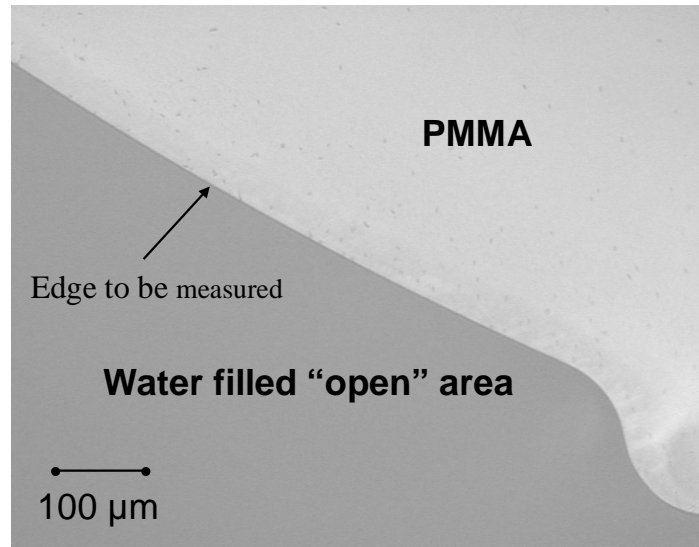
Typical microscope video image used for edge detection and measurement of the wet PMMA mold . The mold is taken out of the immersion bath and water remains in the mold without wetting the top edge that is inspected.
